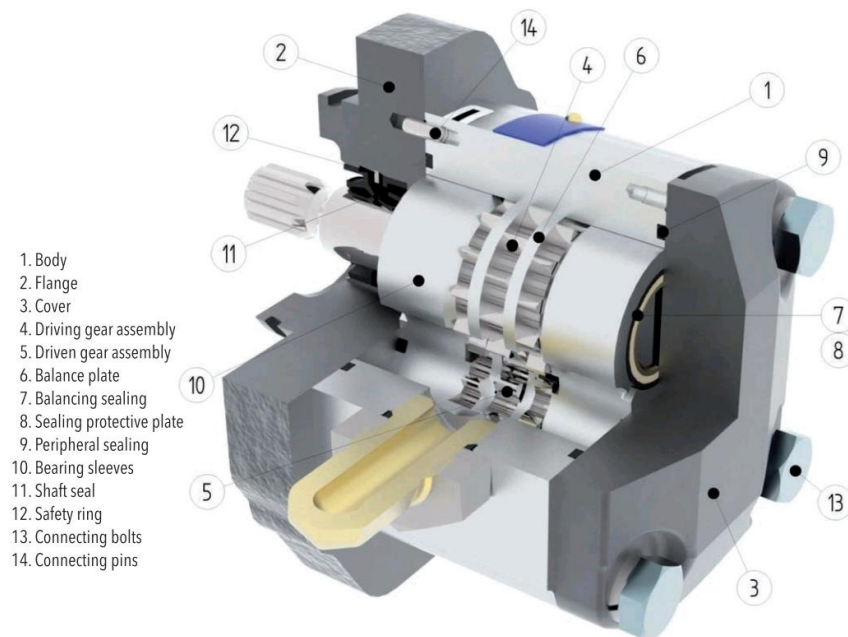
Gear Pump Jihostroj T3T – lower pulsations [3].
